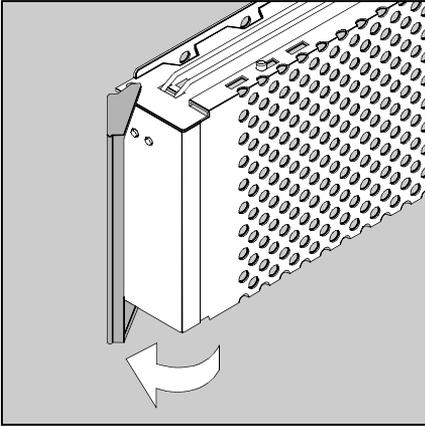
Handle on the 3½ inch mounting frame for 3½ inch hard disks
